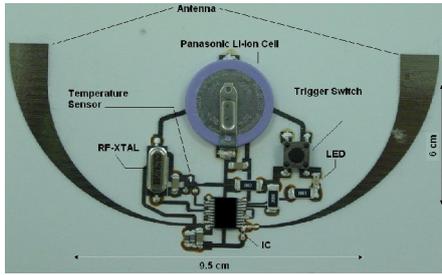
Wireless Sensor transmitter prototype on paper substrate using silver inkjet printing technology.
